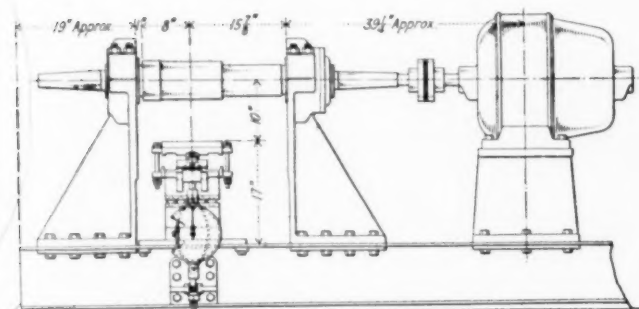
ARRANGEMENT OF BEARING TESTING MACHINE
